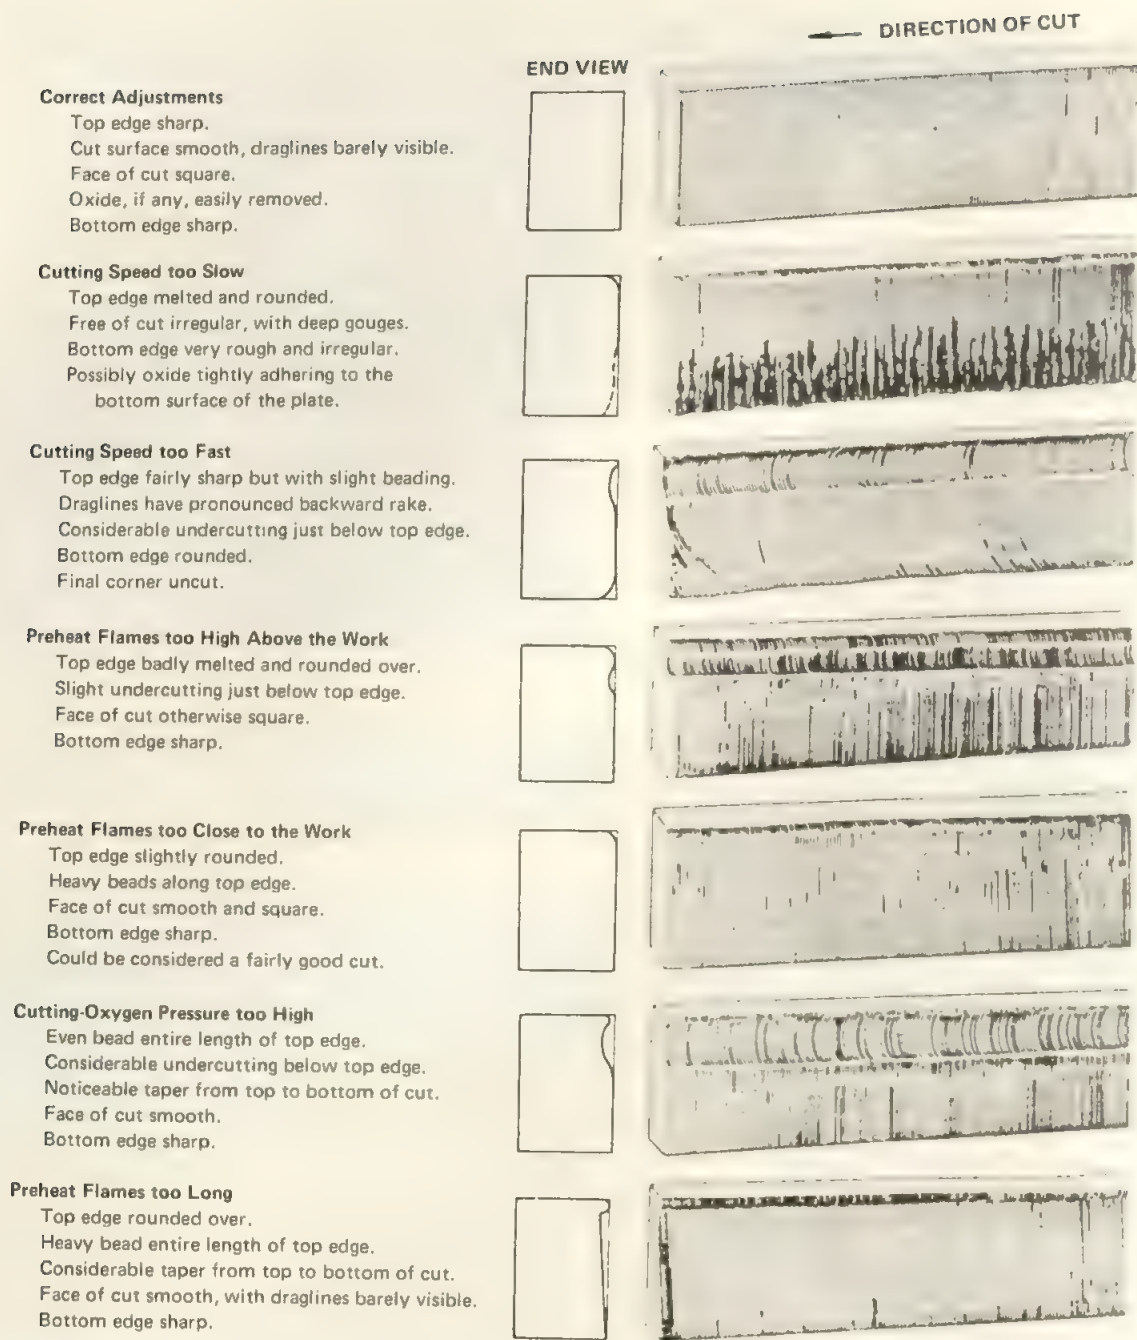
Machine cut surfaces: guide for oxygen cutting. (Source: Air Products and Chemicals, Inc.)
